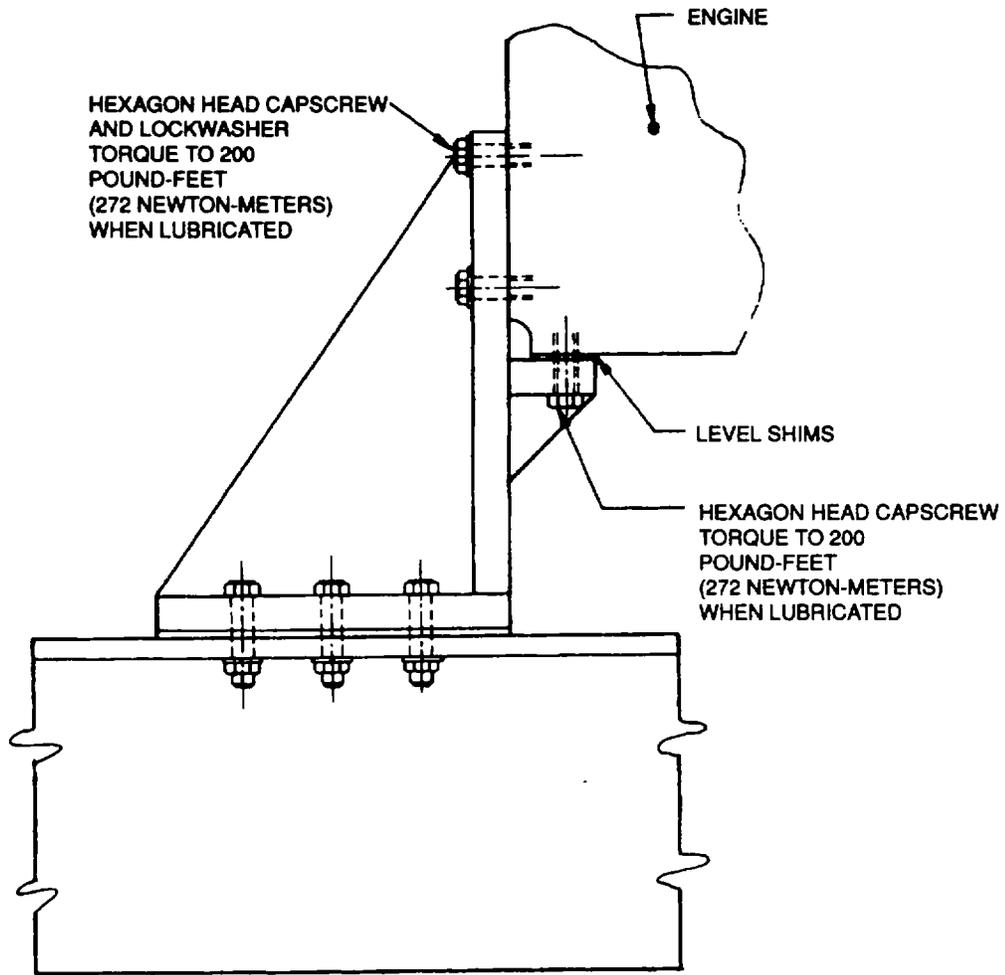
Engine and Generator G1, Removal, Installation, and Alignment (Sheet 2 of 4)
